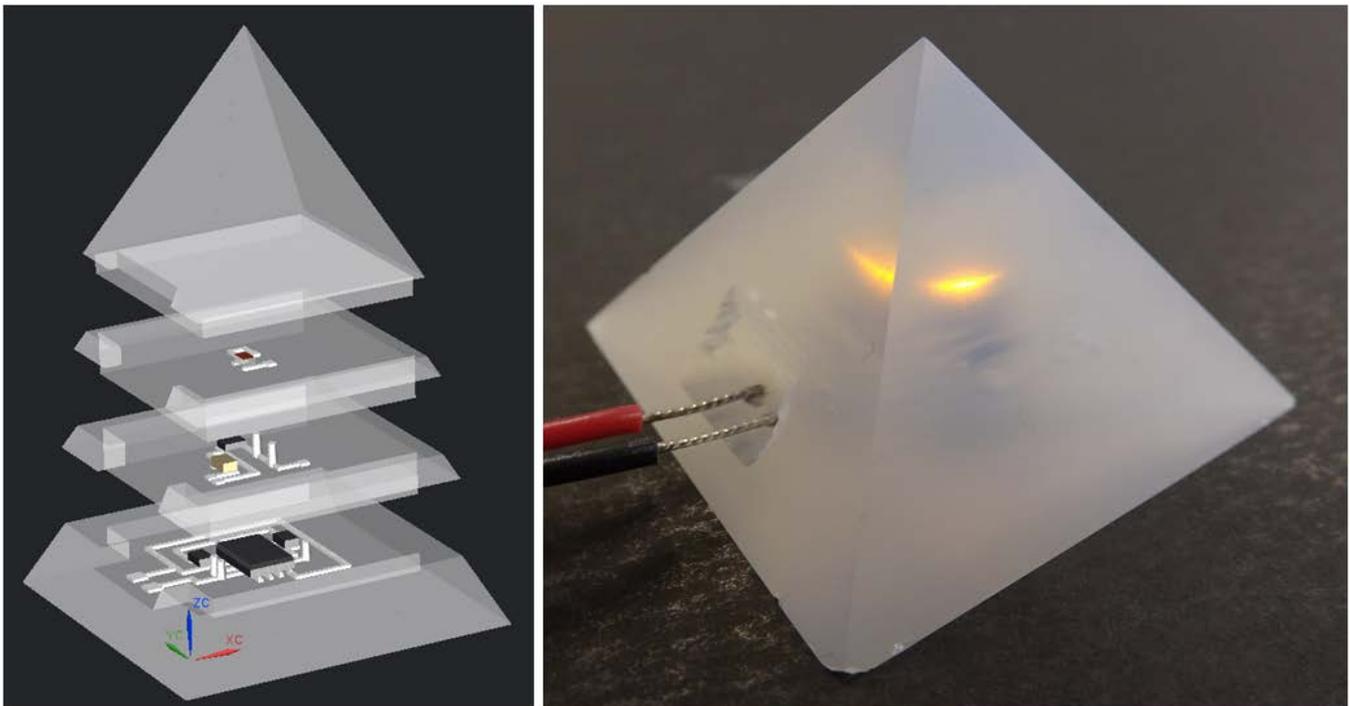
Pyramid demonstrator a) design and b) fabricated specimen
